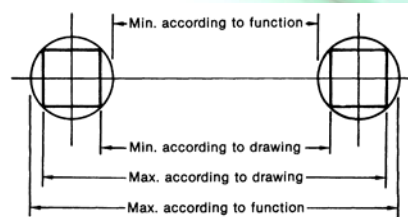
Geometric dimensioning and tolerancing allows us to reduce costs by not scrapping "good parts."
